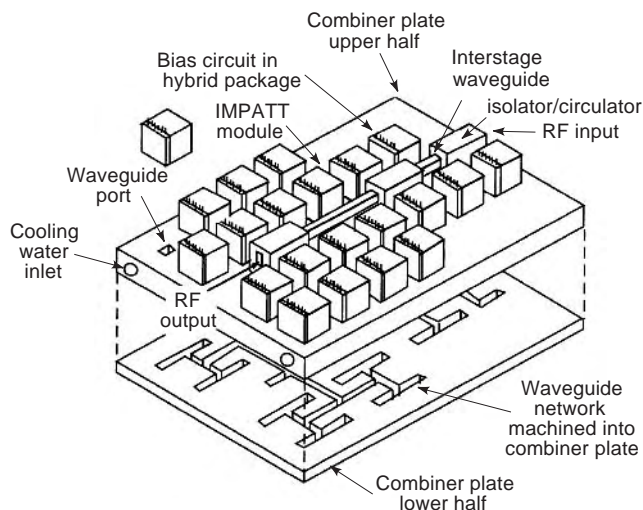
Concept drawing of an IMPATT transmitter using a combiner plate.
